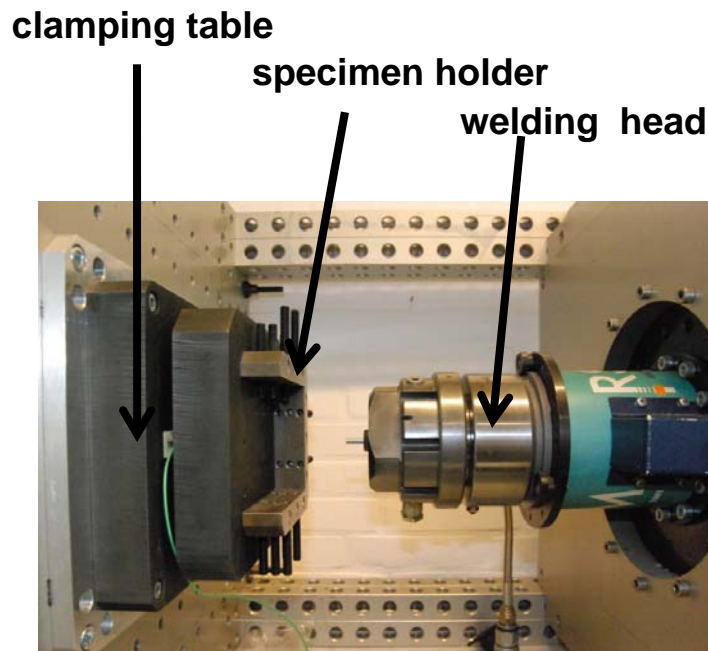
RSM 400 welding system used for FricRiveting
